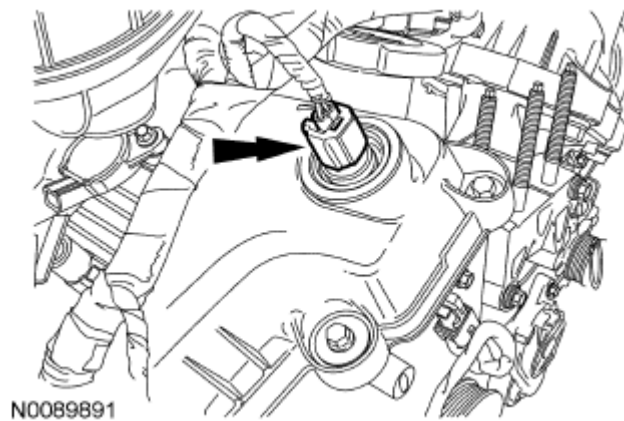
Locating RH Variable Camshaft Timing Electrical Connector
